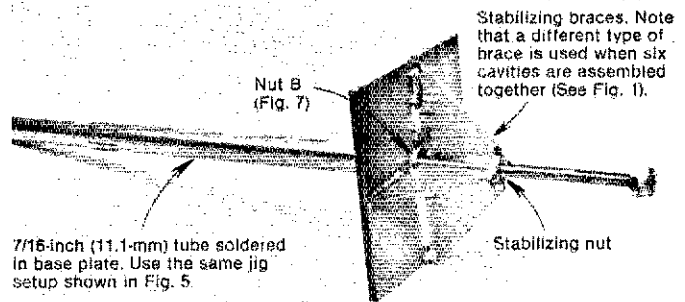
The completed frequency-adjustment assembly for a single cavity. Note the two nuts used at the end of the threaded rod. These were tightened together to form a "handle" for easy frequency adjustment.
